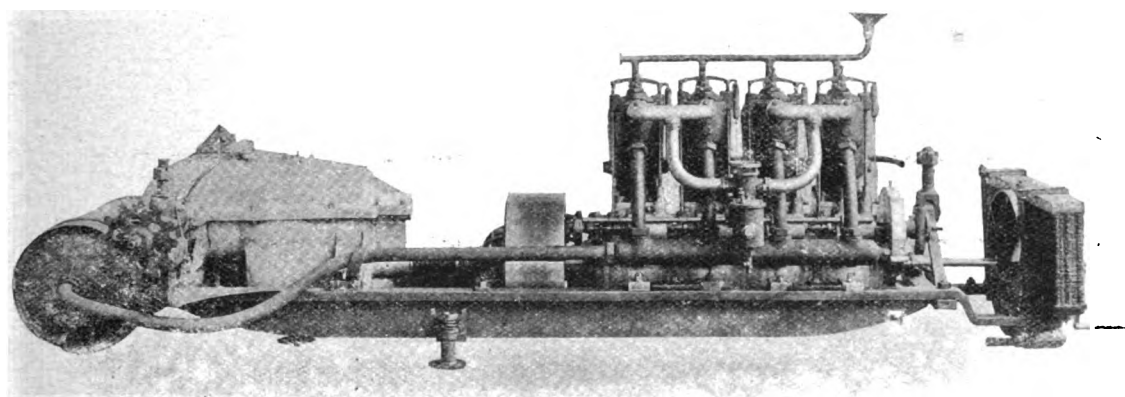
The Lower Frame, with Motor, Clutch and Gear of the "Weller" Car.
